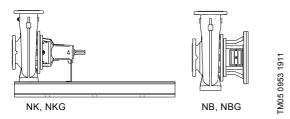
Pumps without motor (update drawing, refer to NB I&O)
